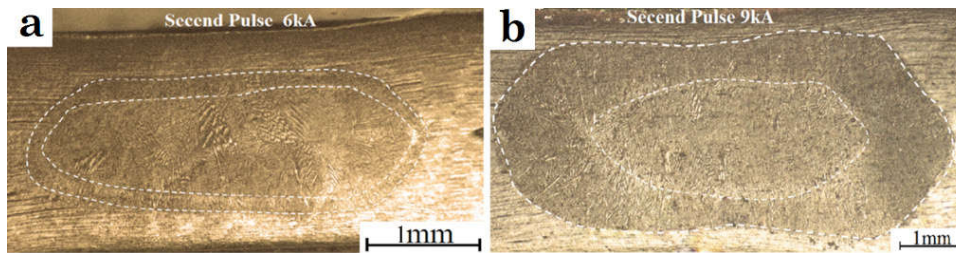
Macrographs of the cross sections of the resistance spot welded samples (a) W2, (b) W3, The center of the button (nugget) is separated from the primary welding with a dashed line.
